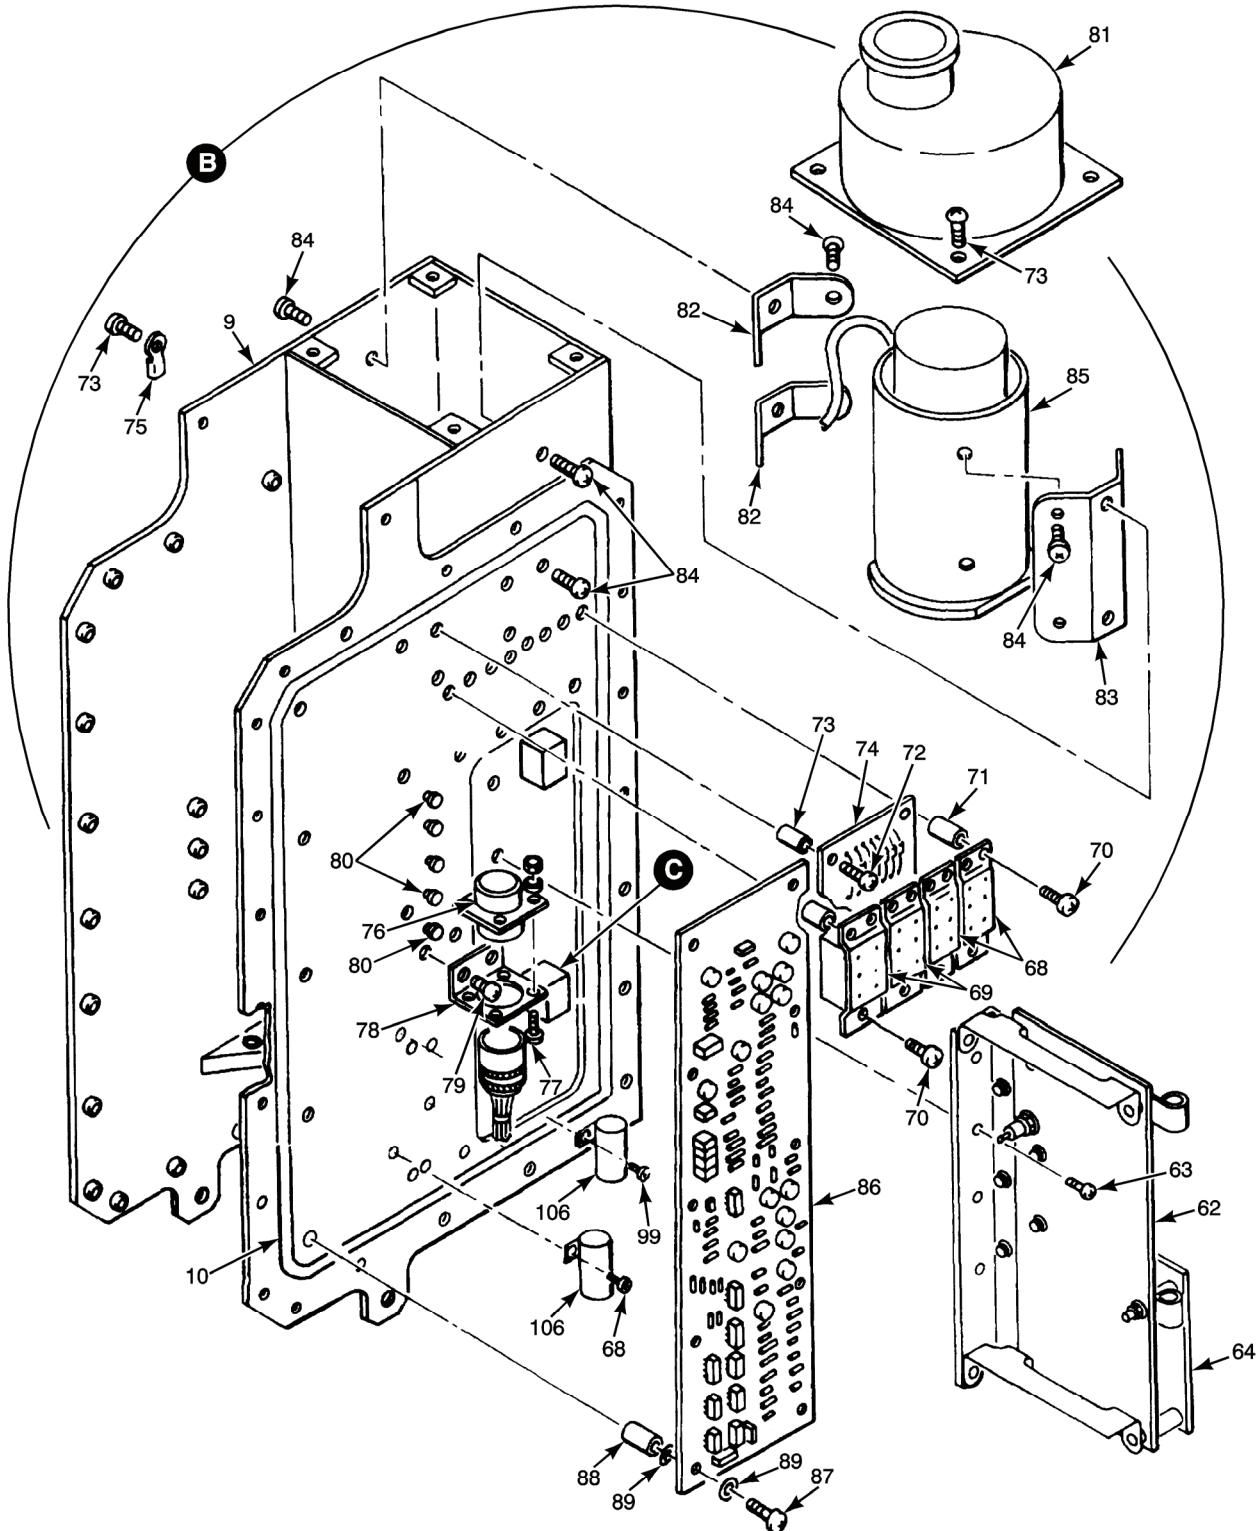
Control Panel Assembly. (Sheet 1 of 3)
